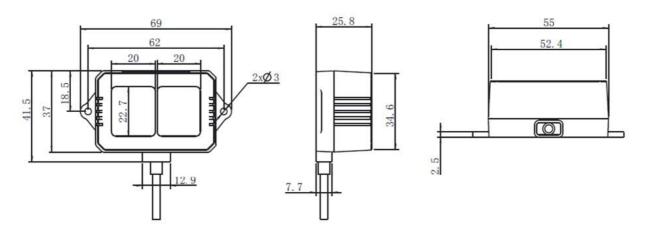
Dimensions of TF02-Pro (Unit: mm)
